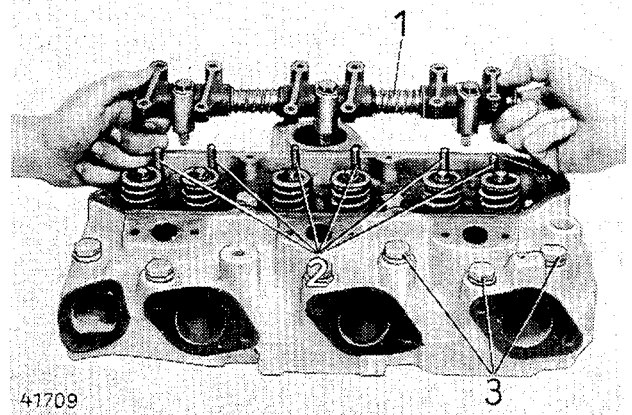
Removal of Rocker Arm Shaft Assembly
